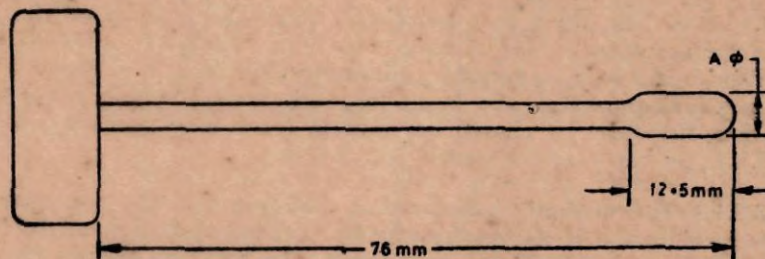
GAUGE PLUG FOR TESTING CONSTRICTION OF BORE OF HOSE
